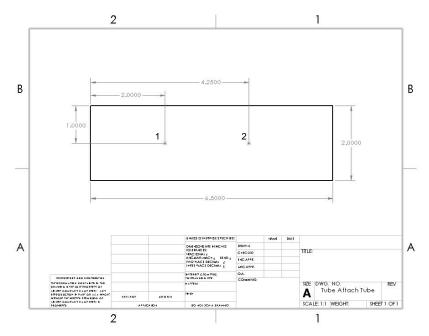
SolidWorks drawing of tube attachment plate. Washer for spring attachment at position 1.Washer for turnbuckle attachment at positions 2.
